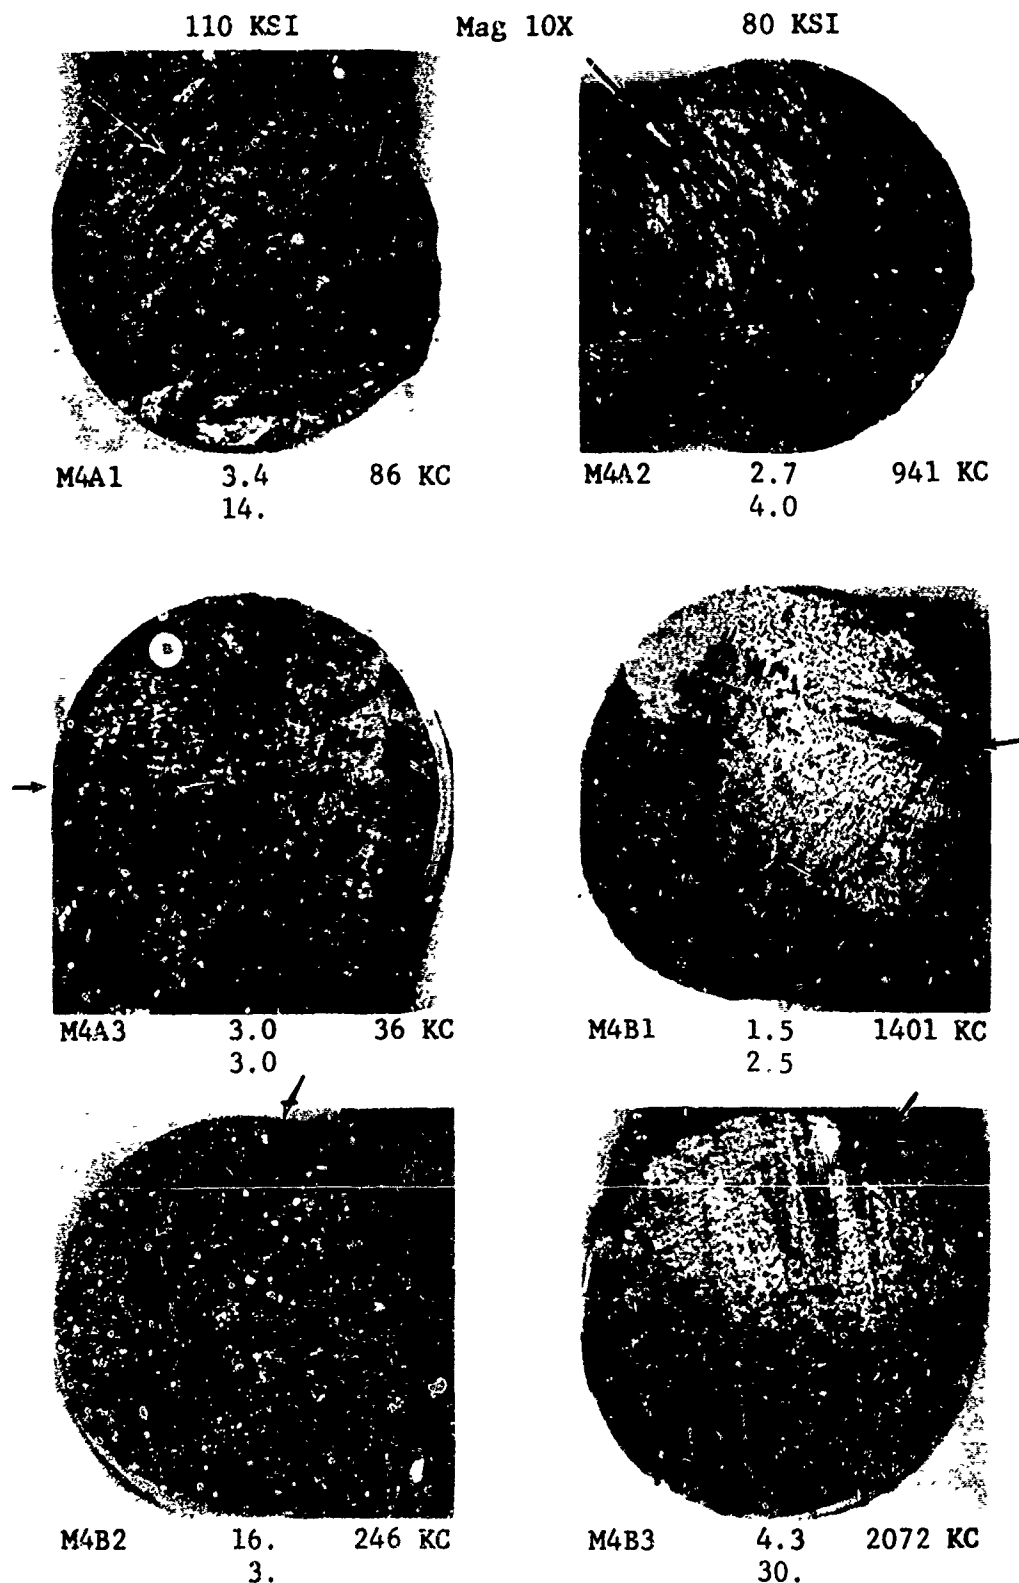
Fracture Surfaces of Failed Fatigue Specimens Series M4-Double-Bond/Single-Axis Diffusion Bonded with 7.5% Deformation
